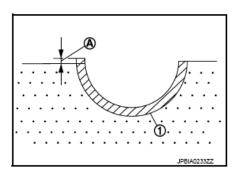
Identifying Connecting Rod Bearing Crush Height Courtesy of NISSAN NORTH AMERICA, INC.
